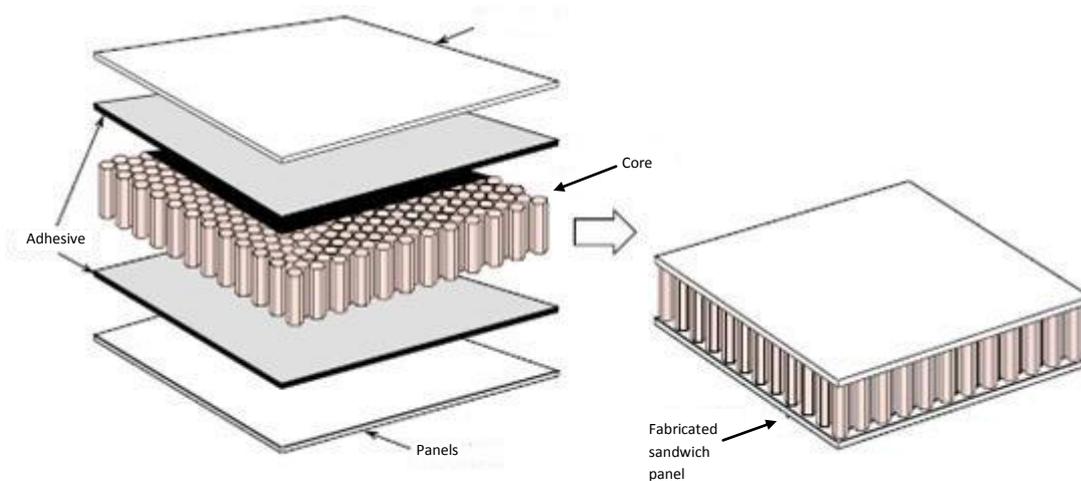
Manufacturing of a sandwich panel in this case using an adhesive layer (43).
